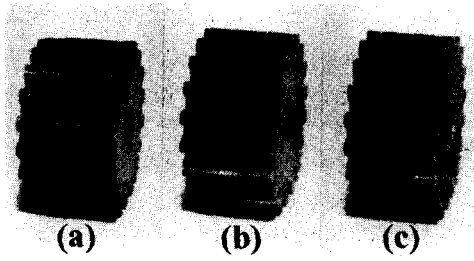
Cold forged spur gear (guiding type, h=15mm)
